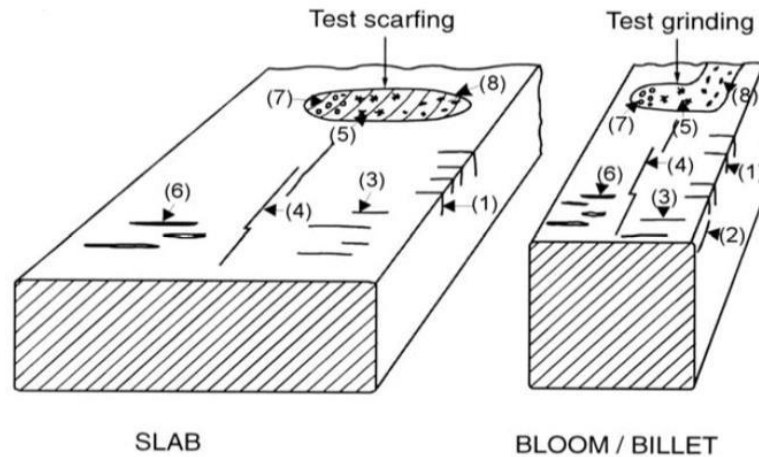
Surface defects [3,39] 1. Transverse corner cracks; 2. Longitudinal corner cracks; 3. Transverse cracks; 4. Longitudinal cracks (broad face); 5. Star cracks; 6. Deep oscillation marks; 7. Pinholes; 8. Macro inclusions
